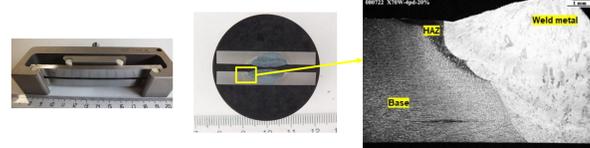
Tests on 4pb specimens (ISO 7539-2, ASTM G39 standards)
